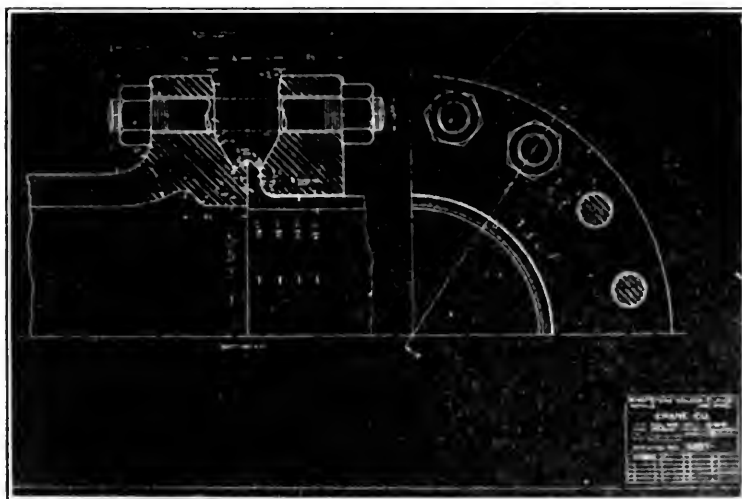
Shows a joint in steam header. These are made with the flange fairly loose on the pipe but with the pipe faced over the flange where the joint is to be made. The faces making the joint are carefully machined and the edges are scraped and welded at the tip after the pipe is made up. No gaskets are used.
